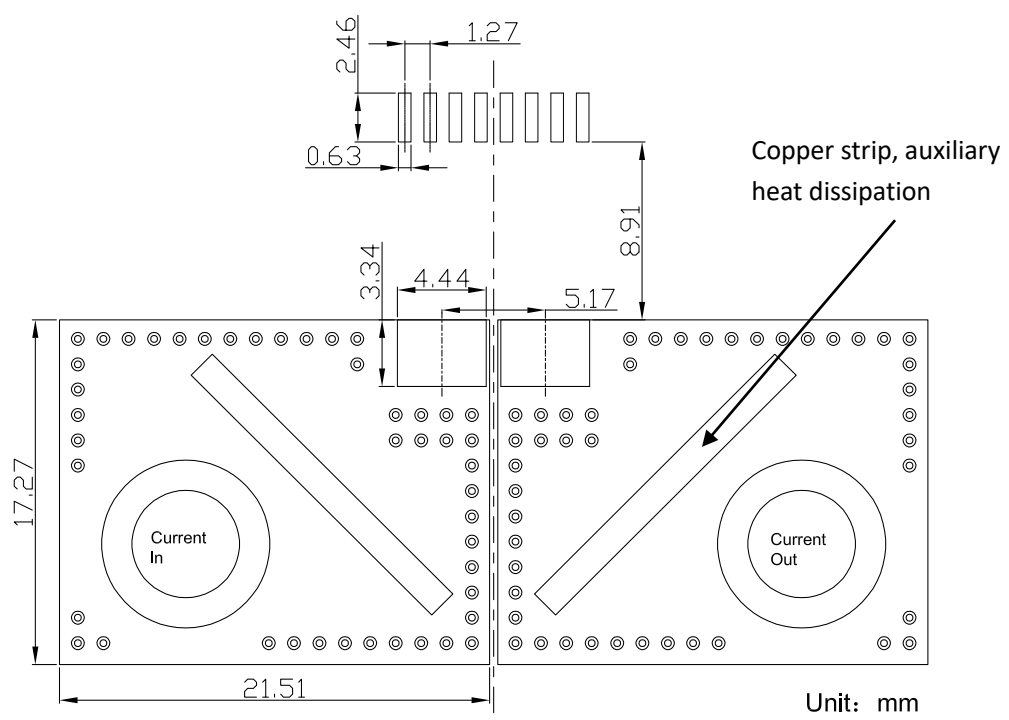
the recommended footprint of the SMT PCB layout for the STK-616AM5 series products. The unit is mm.
